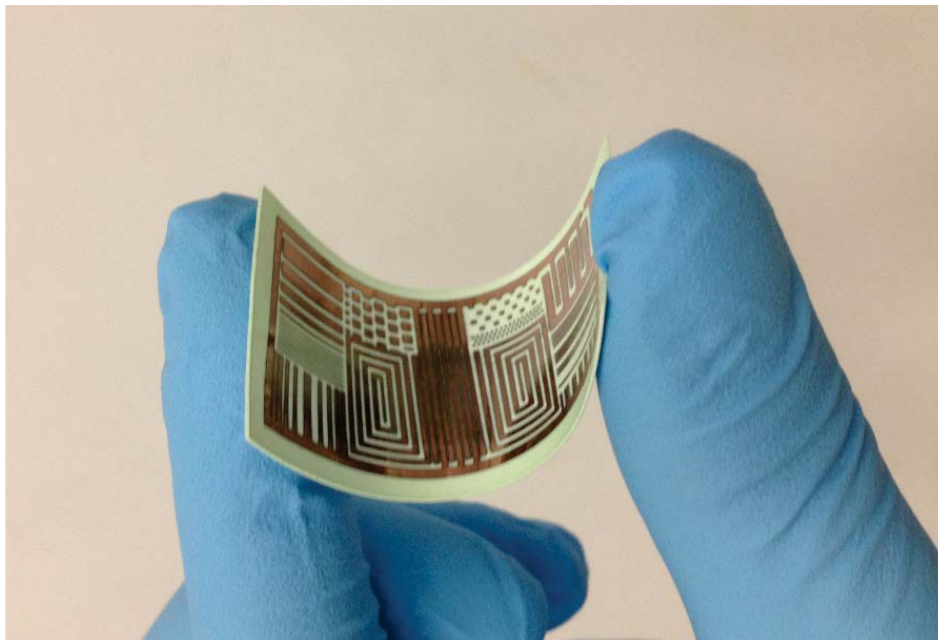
Integrated test pattern of the new printed electronics fabrication method
